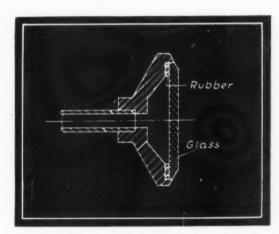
This vacum chuck is adapted to holding thin sections to be worked
